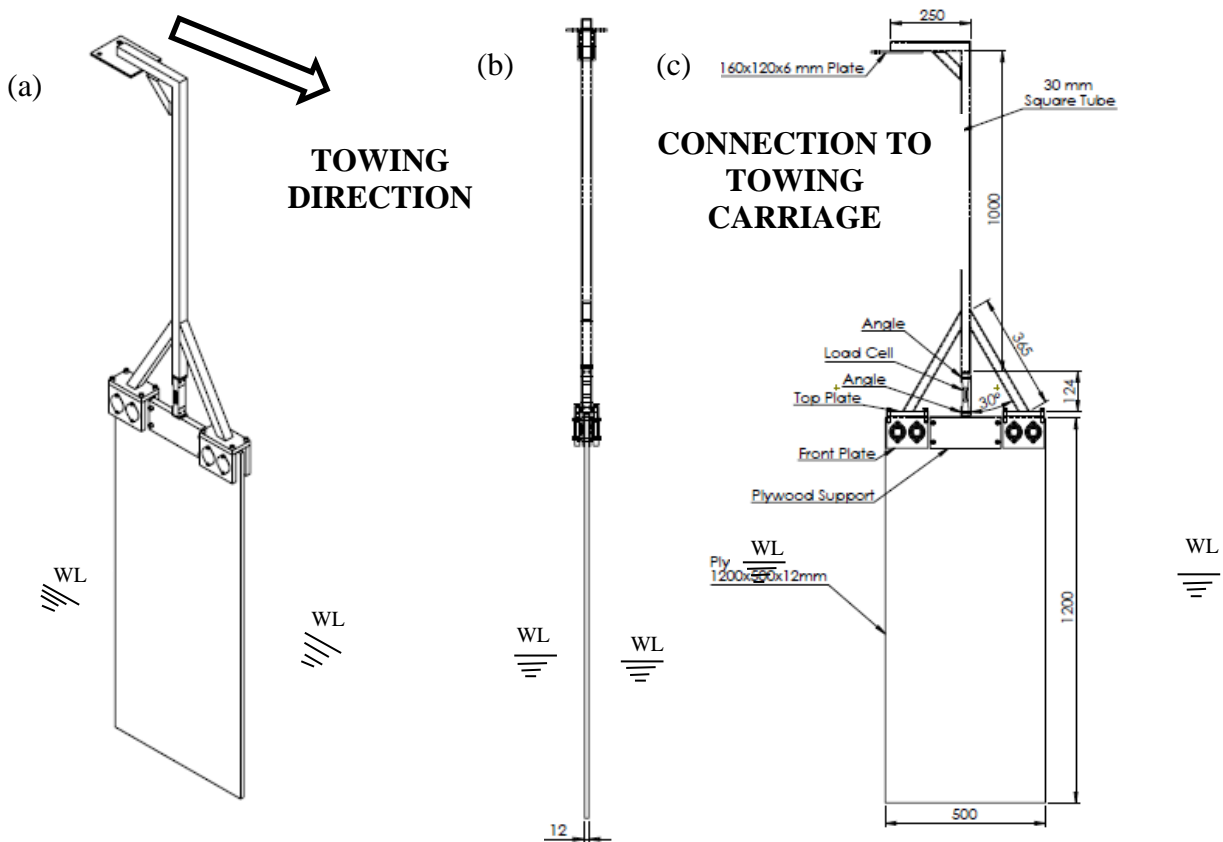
Towing tank test setup (a) Perspective (b) Body plan (c) Profile view
